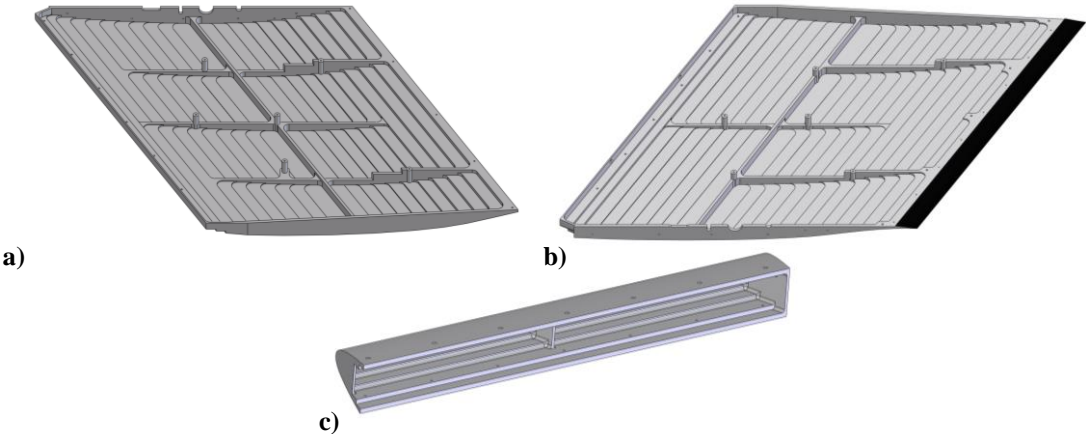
Internal structure of SWIFT, a) test side part, b) non-test side part, c) leading-edge part
